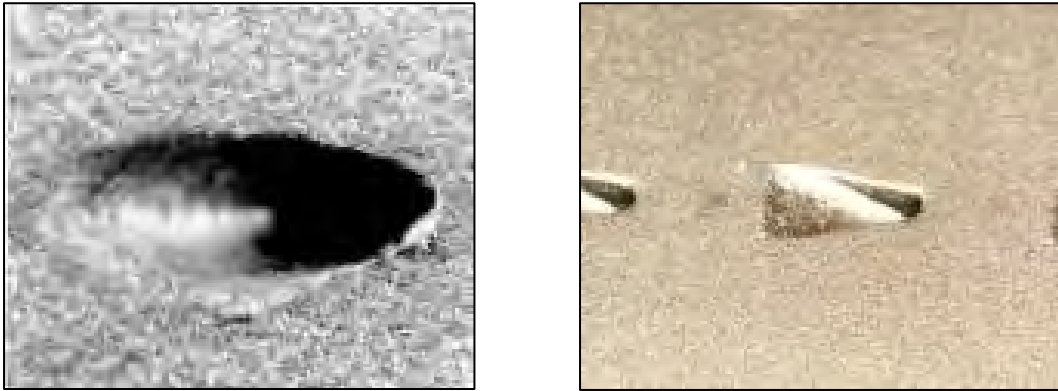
Left image is of a typical laser drilled hole. Image at right is a laser machined diffuser.
